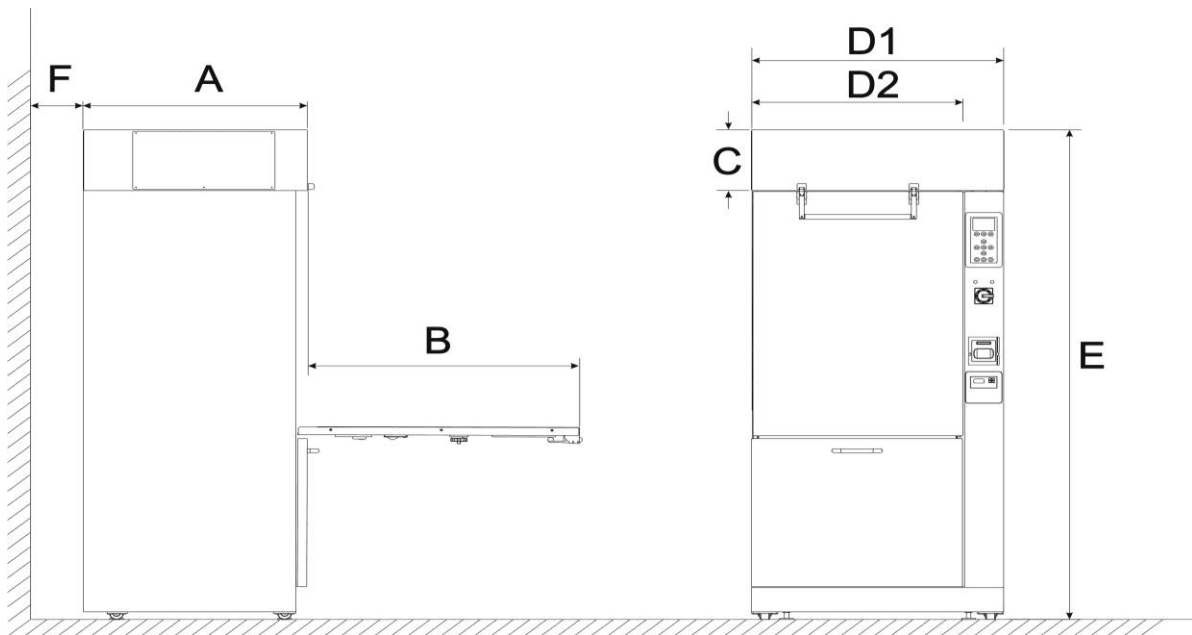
Schematic drawing GW6090 and WD6090, overall dimensions of the product
